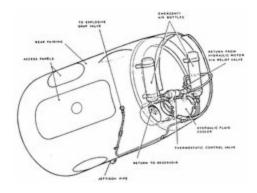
Mk 20 hose-drum unit emergency brake air system
